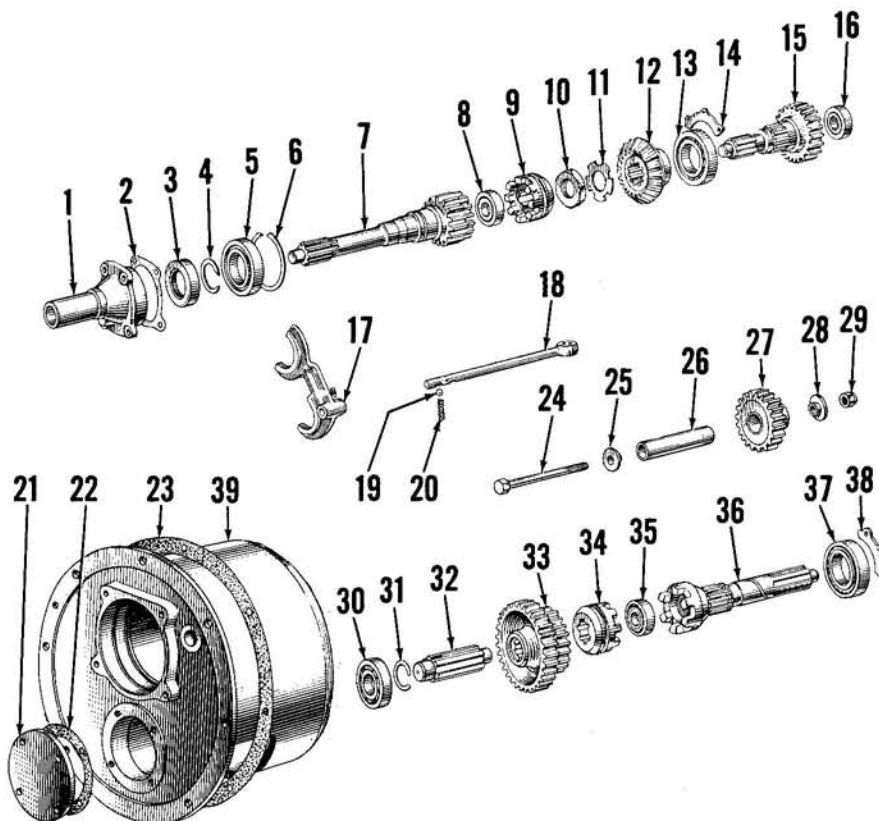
Exploded view of primary gearbox assembly for single clutch models. Refer to Fig. 134 for gearbox used with dual clutch (Live PTO) models. Fig. 132 shows assembled view of gearbox.
